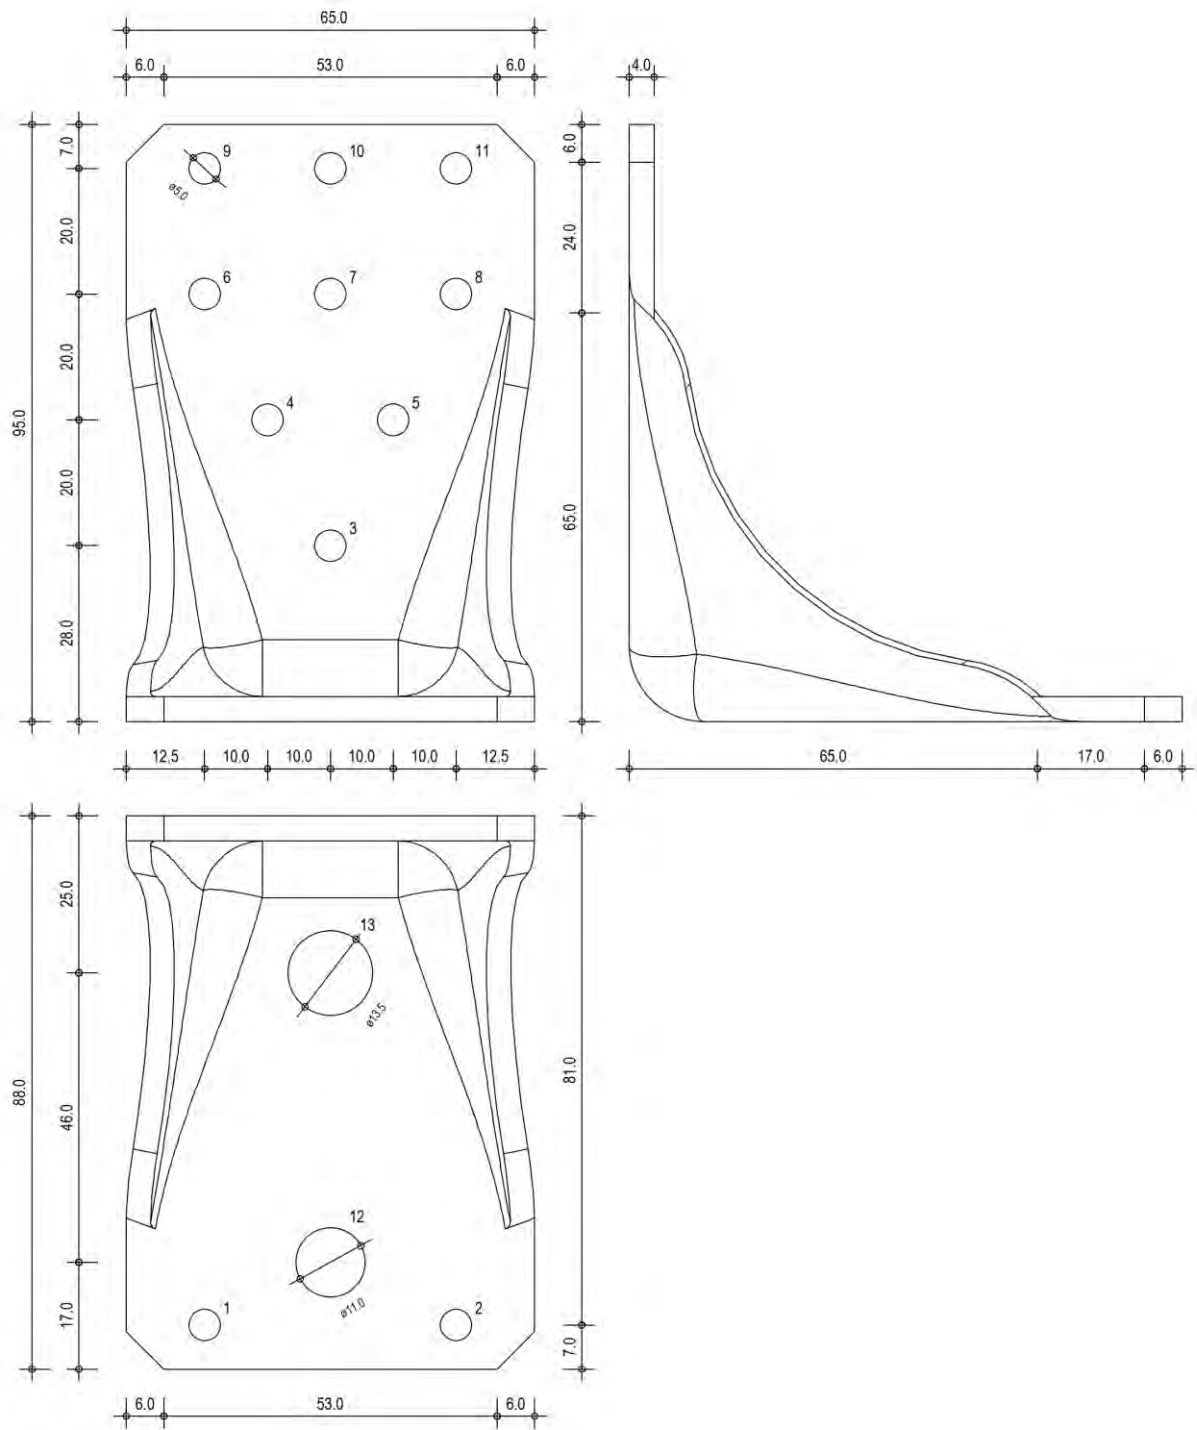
Dimensions of Angle Brackets 110095L and 112095L
